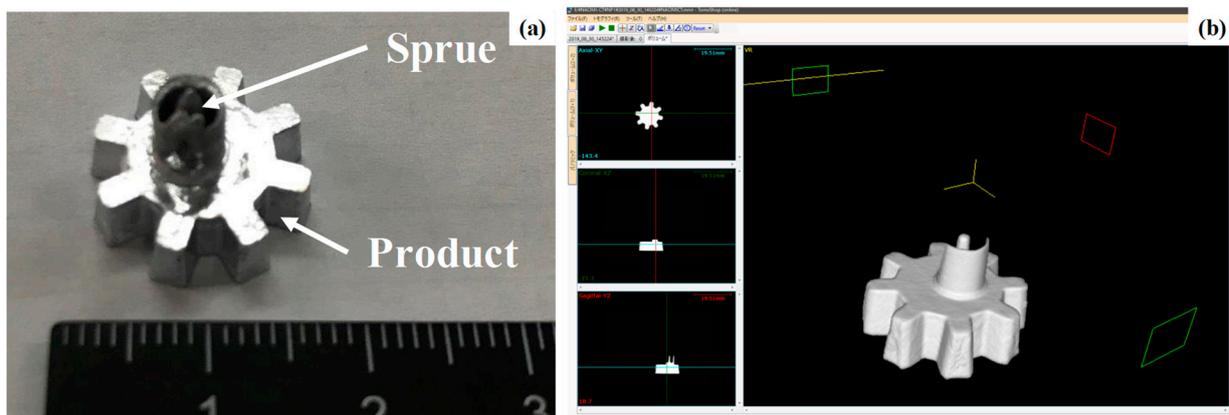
PIG die-cast, small-sized gear block by using a single PIG-nozzle unit. (a) The cast and solidified pure aluminum gear block, and (b) X-ray tomographic image of gear block.
